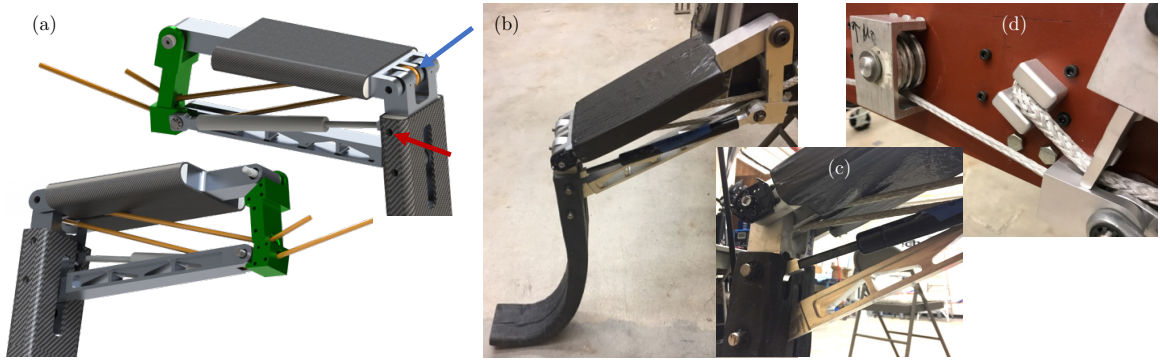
Final design iteration CAD and physical implementation. (a) shows the CAD model, (b) shows the right leg assembly view from the front, (c) shows the right leg assembly where the cable routing is visible, and (d) shows the internal cable routing within the “fuselage.”
